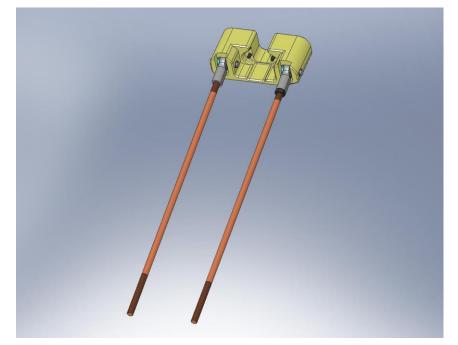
After the retaining rings are clamped on, the top part of the Spring Pull-Down Assembly is complete. Set aside for later use.
